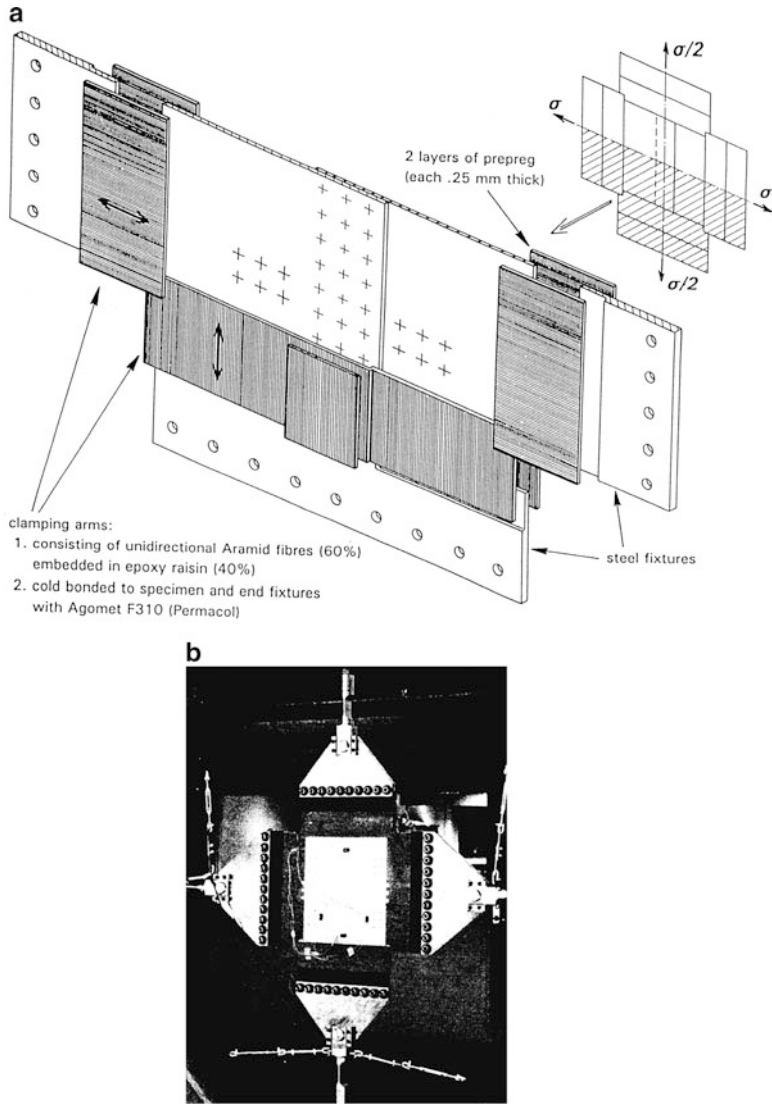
Biaxially tested lap joint specimens: (a) specimen design; (b) specimen mounted in the test frame (Vlieger et al. 1994)
